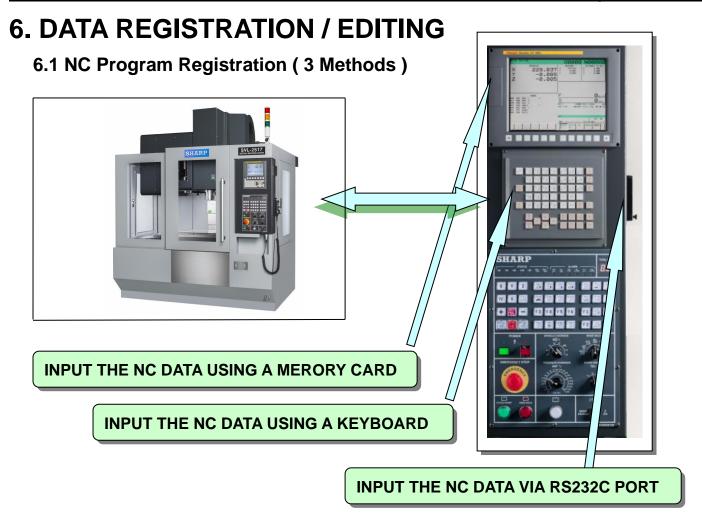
POSITION OF RS232C POART / MEMORY CARD INTERFACE / KEYBOARD
